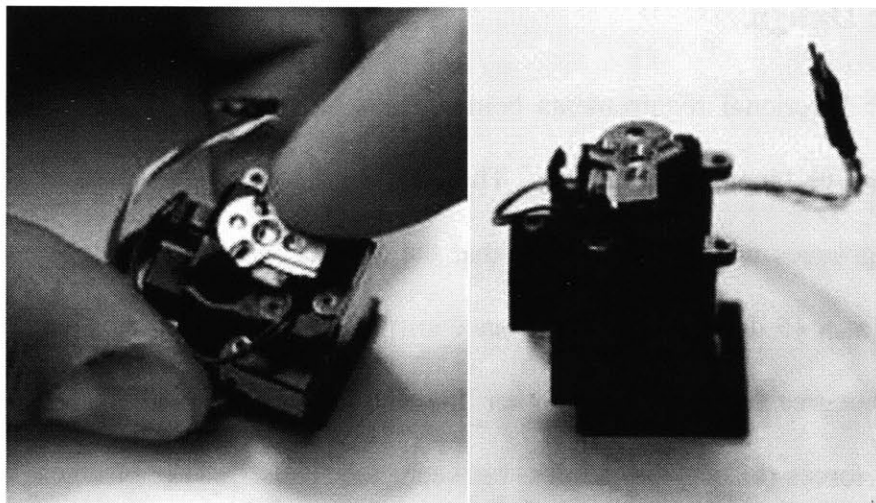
Fixture groove side mounted to DPN 5000 universal mount
